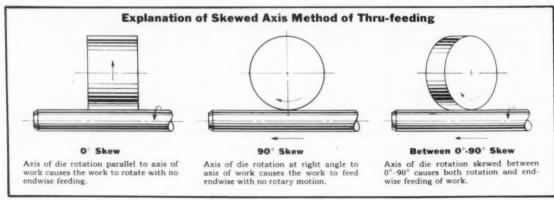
Diagrams illustrating skewed axis-method of through-feeding on Reed machine, Fig. 1
